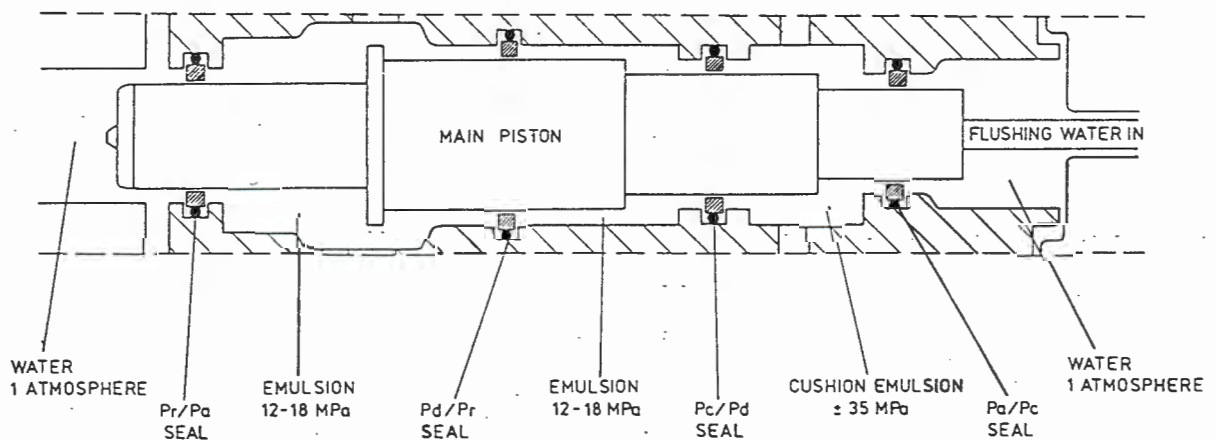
The main piston and piston seals in the actuator assembly of the hand held rockdrill
